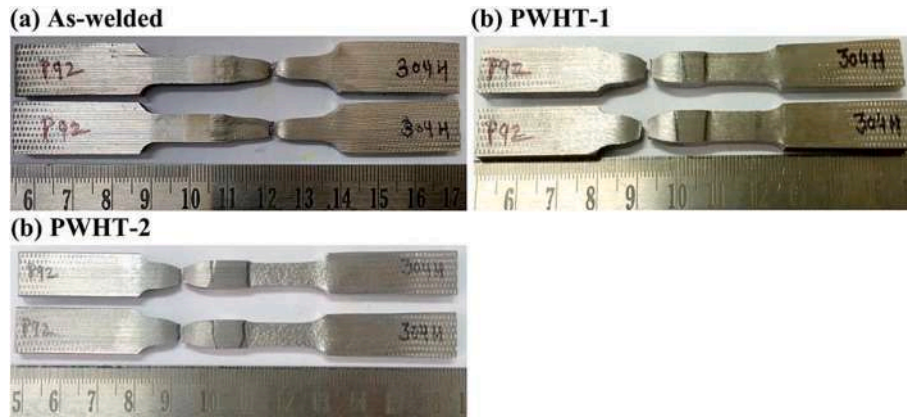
Photographs of tensile test specimens after test: (a) in as-welded condition, (b) after PWHT-1 and (c) after PWHT-2.
